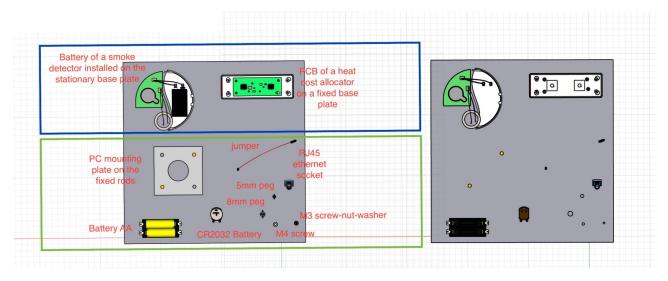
The proposed disassembly task board with its assembled and disassembled elements (top view). The upper part in the assembled board is to benchmark our use-cases in the ReconCycle project, whereas the lower part is inspired from the NIST task board.
